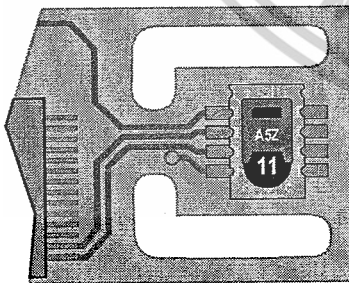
Top view of example of mounted SHT1x with slits milled into PCB to minimize heat transfer.
